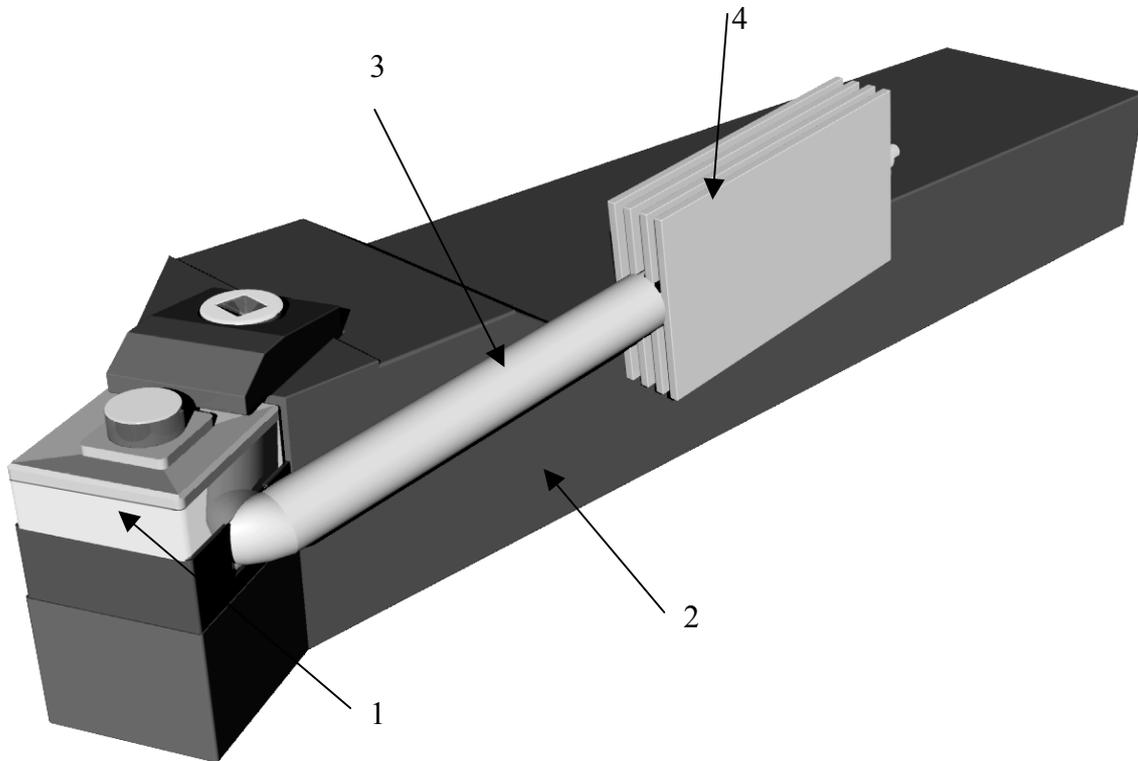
Collapsible cutting tool + heat pipe: 1 – cutting plate; 2 – collapsible cutting tool; 3 – heat pipe; 4 – radiator
